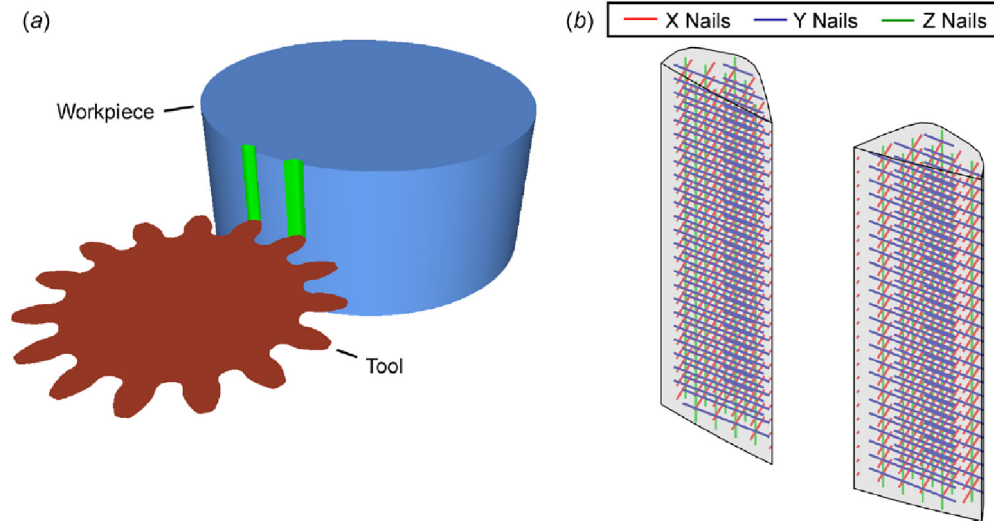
Cutter-workpiece engagement calculation for a shaper model using a dixel-based engine (from [74]).
